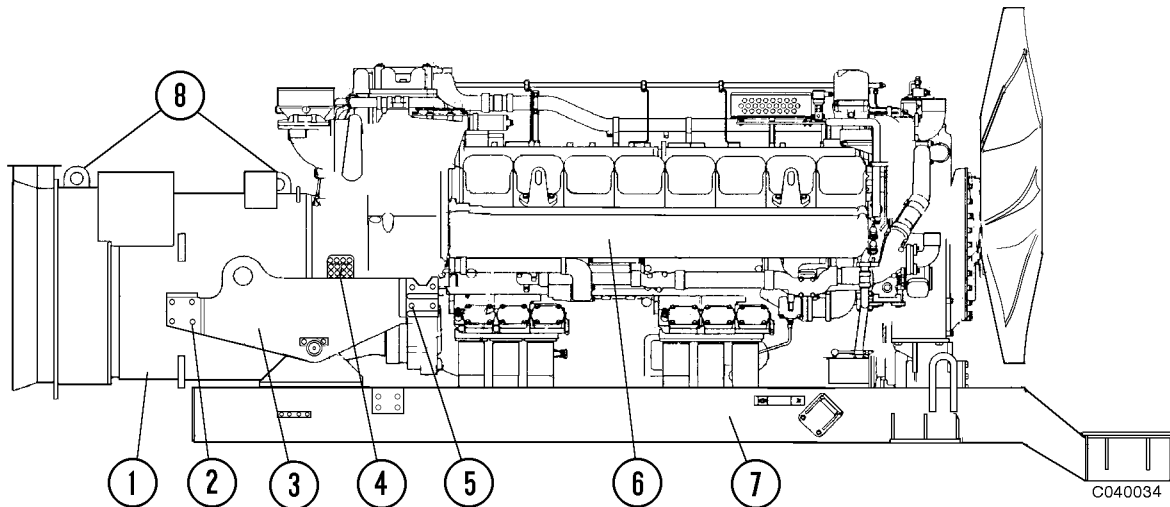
MTU ENGINE AND ALTERNATOR
